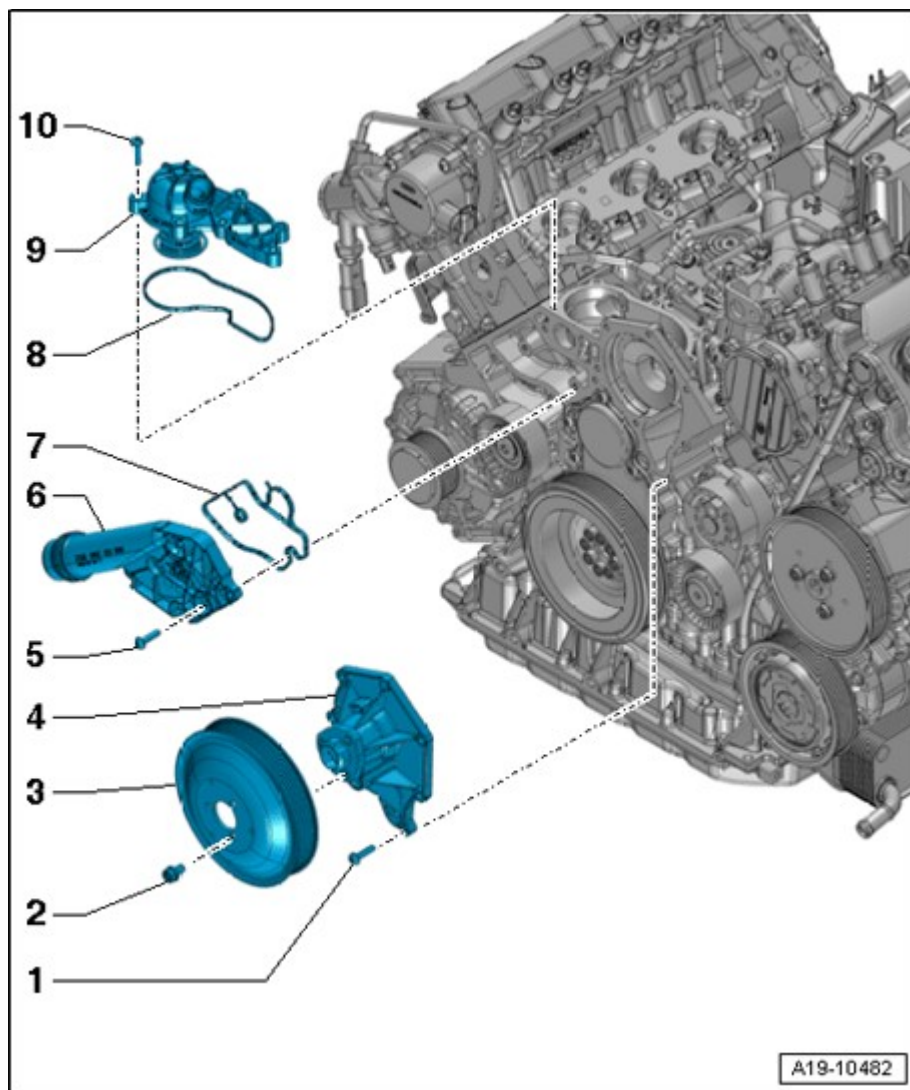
Thermostat, Coolant Pump, Connecting Pieces, Component Overview
